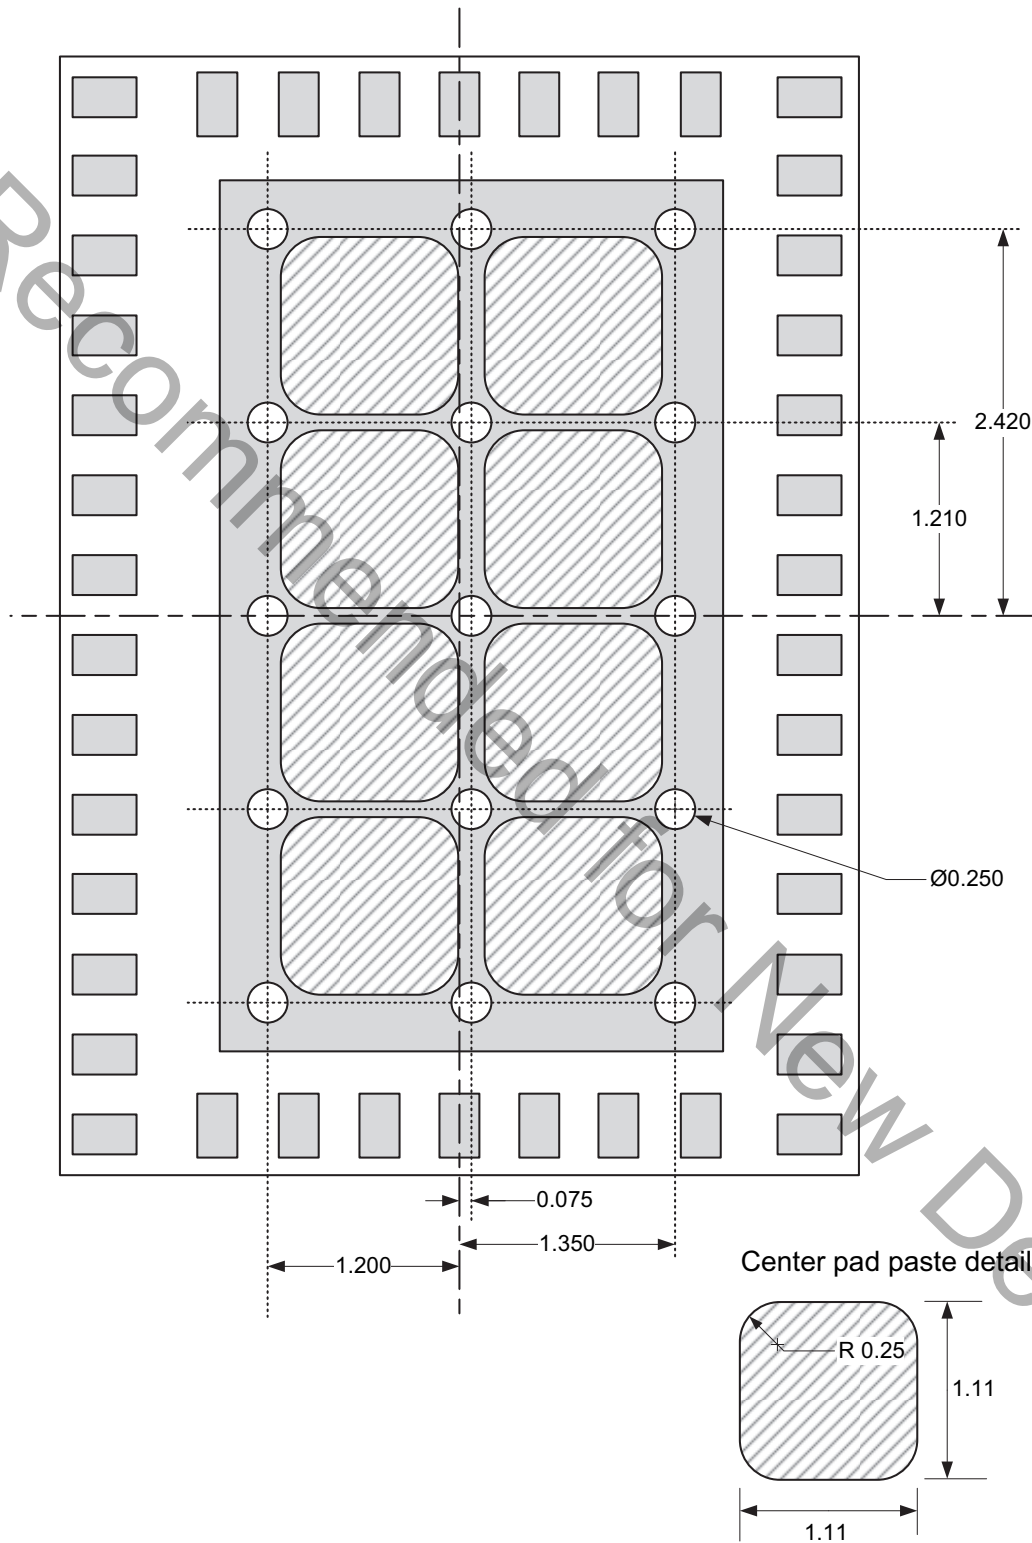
LGA-42 PCB Stencil and Via Placement (Si1010/1/2/3/4/5-C-GM2)
